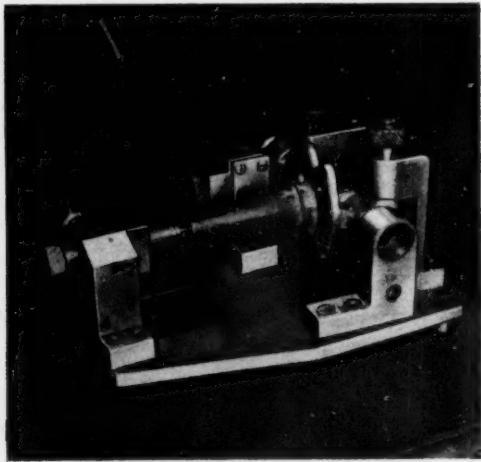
The Fixture Here Shown is Employed for Checking the Machine Settings for Individual Batches of Forgings, to Determine whether they have been Centred to the Best Advantage
